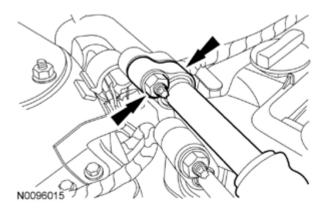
Locating A/C Tube Nut And O-Ring Seal
